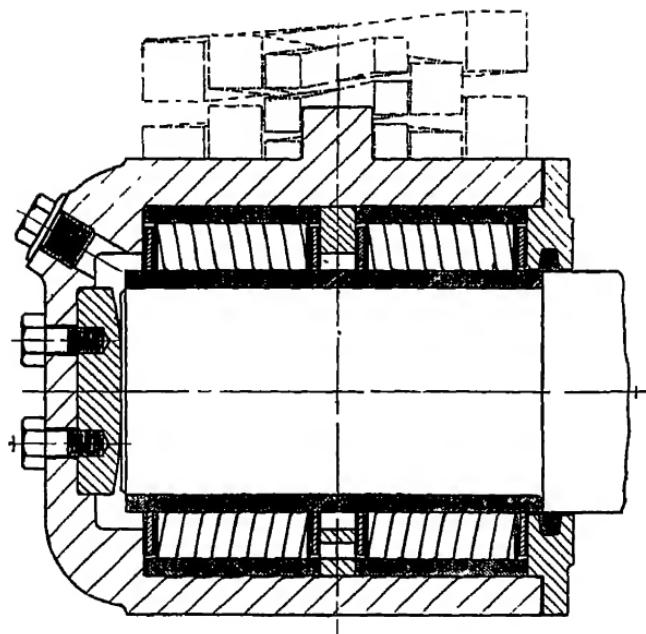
HYATT BEARINGS AS USED FOR RAILWAY CARRIAGE AXLE BEARINGS
